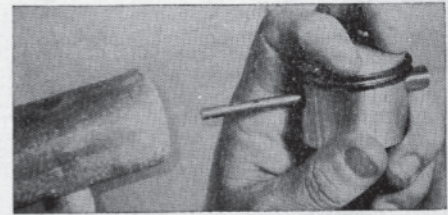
After removing snap rings, the piston pin can be tapped out using a 3/16-inch rod as shown or, on pistons with Spirol pin at exhaust side, by driving piston pin out with slotted driver (Homelite tool No. 23949).
